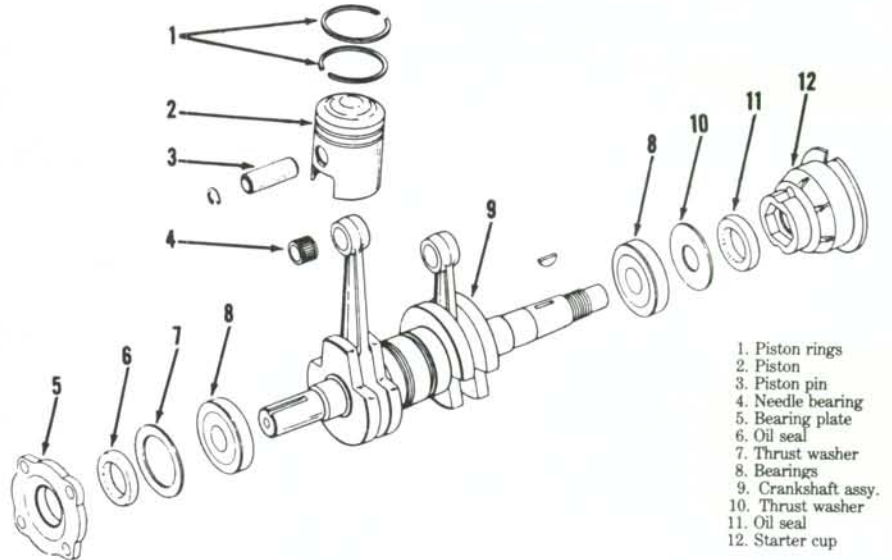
Exploded view of crankshaft, pistons and associated parts used on centrifugal fan engines.
